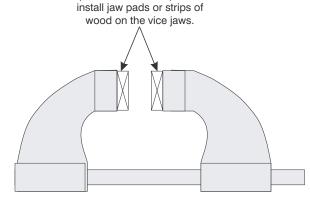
Pad the vise jaws to protect the End Cap threads.
